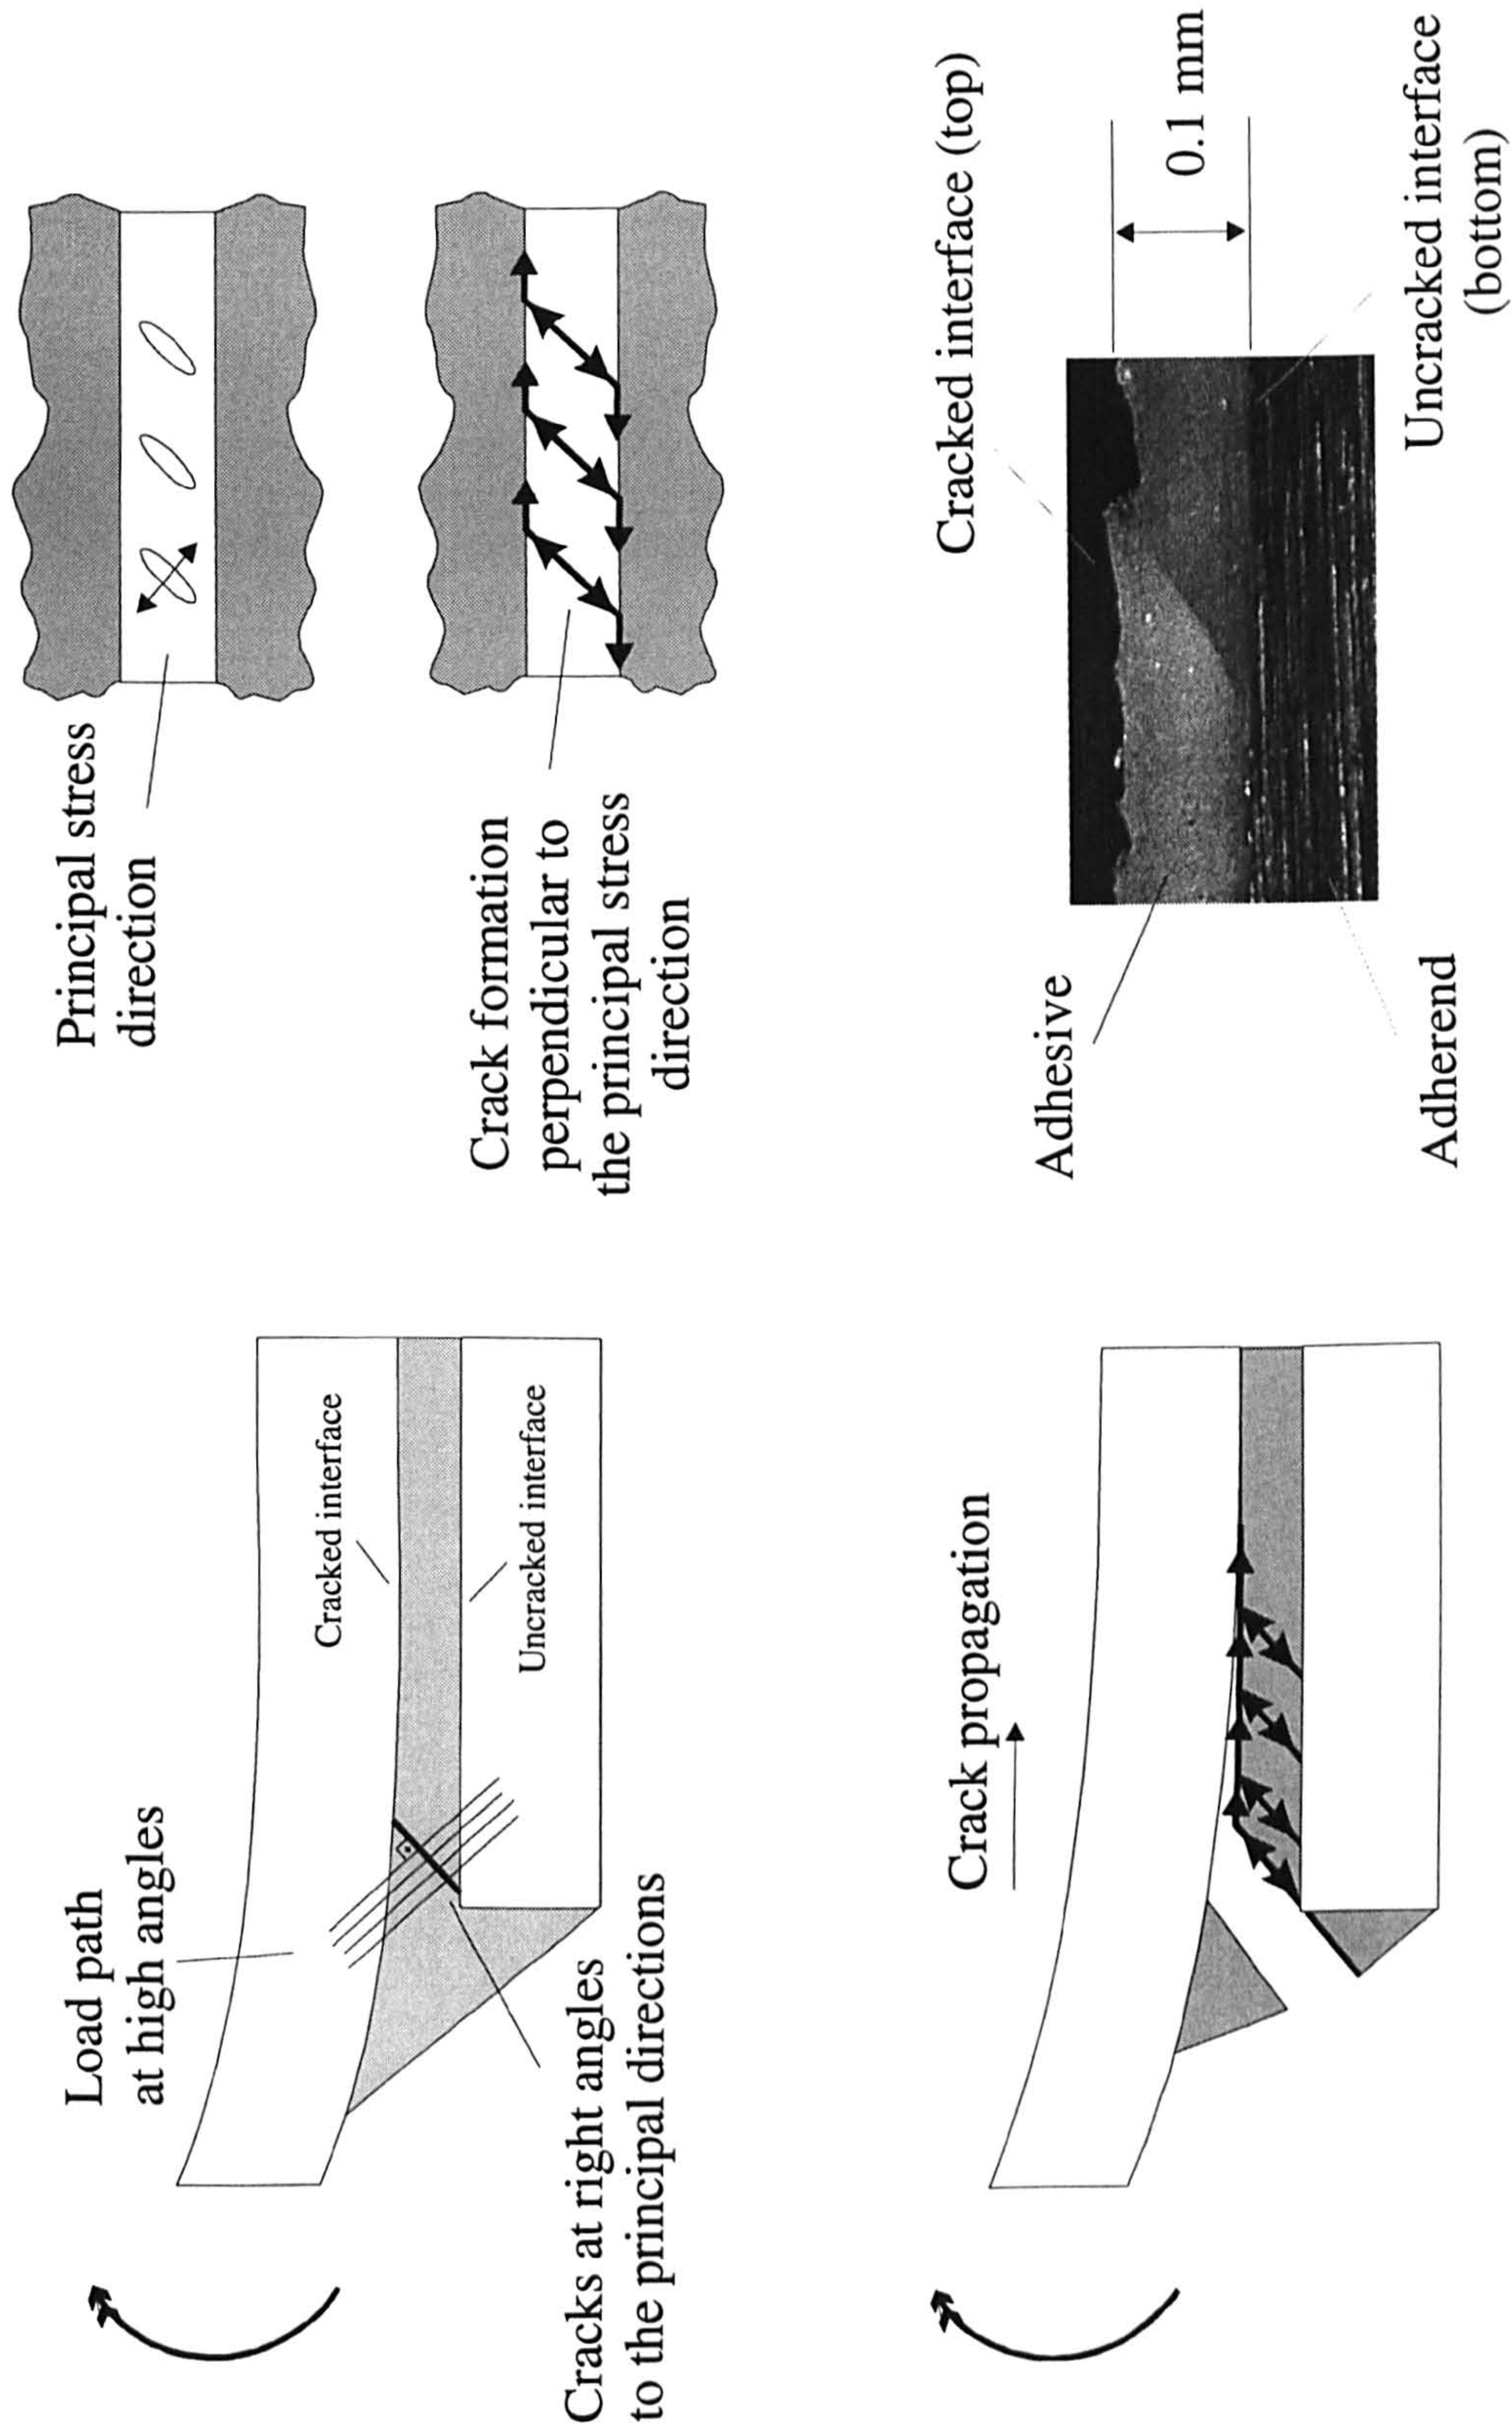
Failure mechanism in a four point bend test - hard Steel and AV 119 adhesive
